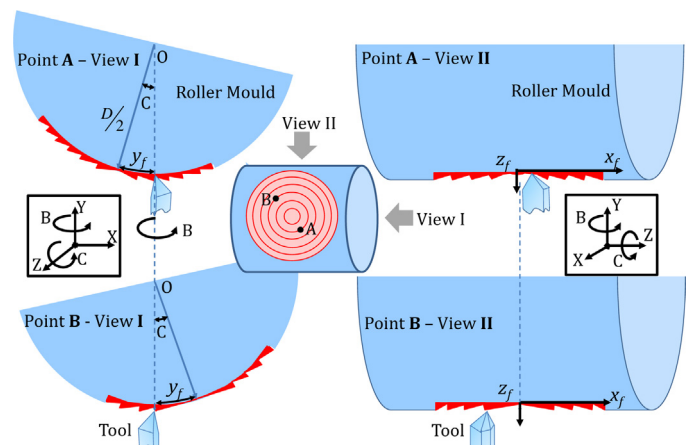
Schematic illustration of tool-workpiece relative positions at two arbitrary points: A and B (View I: side cross-section view; View II: front cross-section view).
